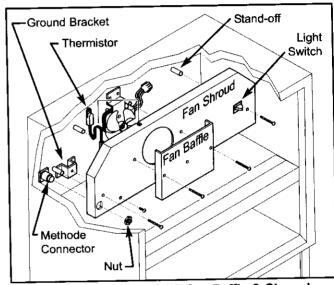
700BC/I-3 Fan Baffle & Shroud
